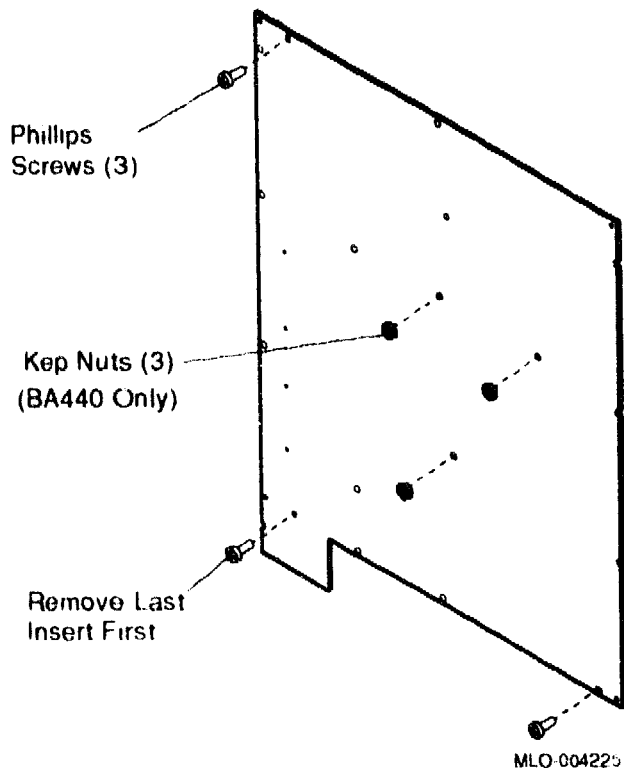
Rear Panel Removal (BA430/BA440)
